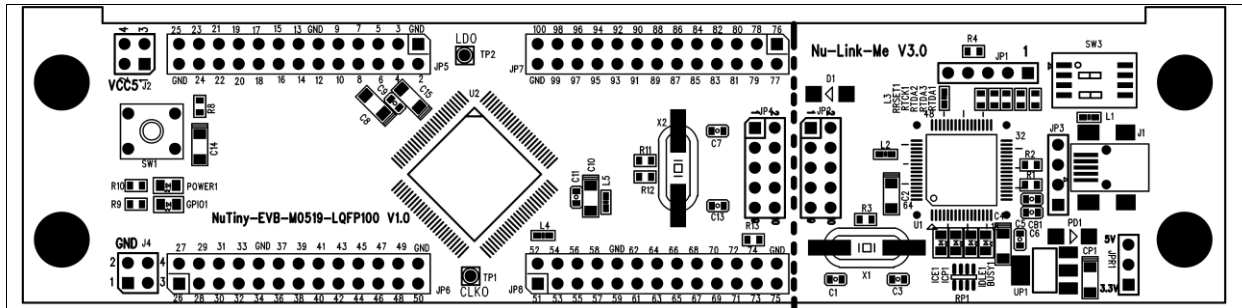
NuTiny-SDK-M0519 PCB Placement
